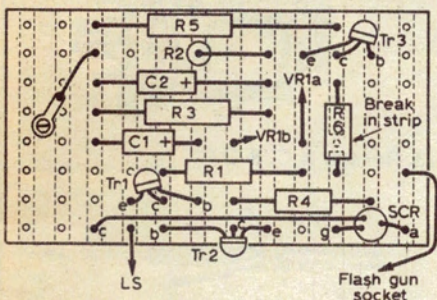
The component layout, on Veroboard. The long wire connecting to the SCR cathode should be sleeved.
